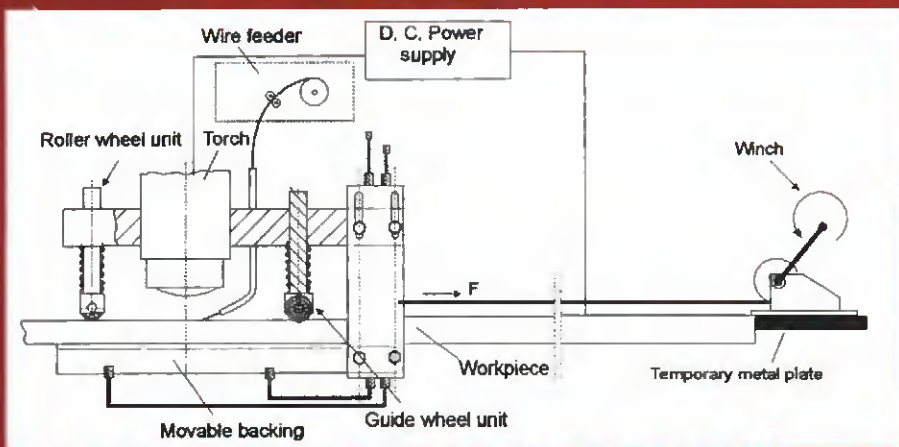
TMFP flux cored wire plasma arc welding with a winch driver.
